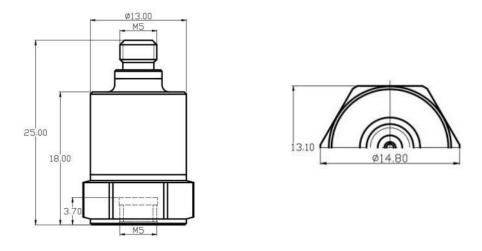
Mechanical dimensions for SSA-P4HT1C3/5/6
